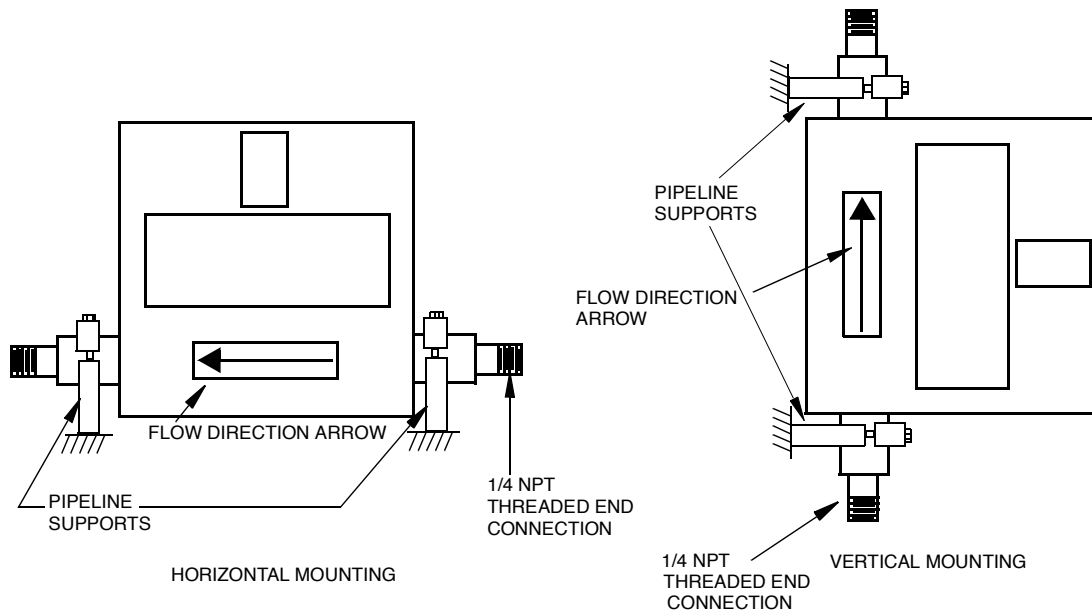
3 mm (1/8-inch) Flowtube Mounting
